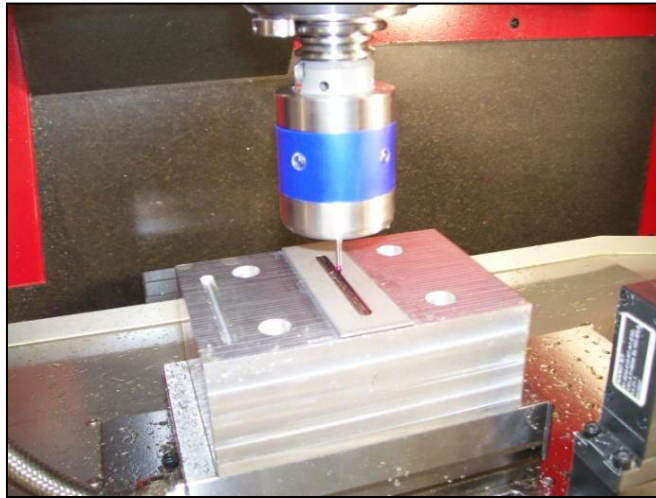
Touch probe system during the measurement of the upper surface of a workpiece.
